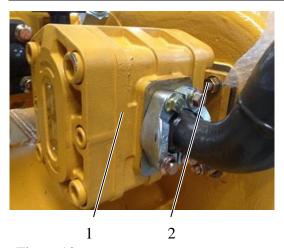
1 Steering pump 2 Stud. nut, gasket
